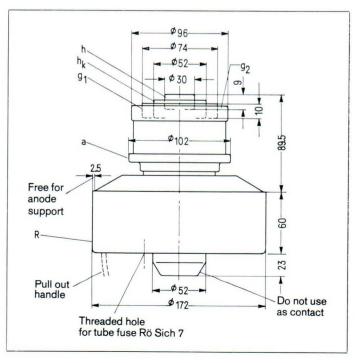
Outline drawing RS 2024 CL Dimensions in mm
